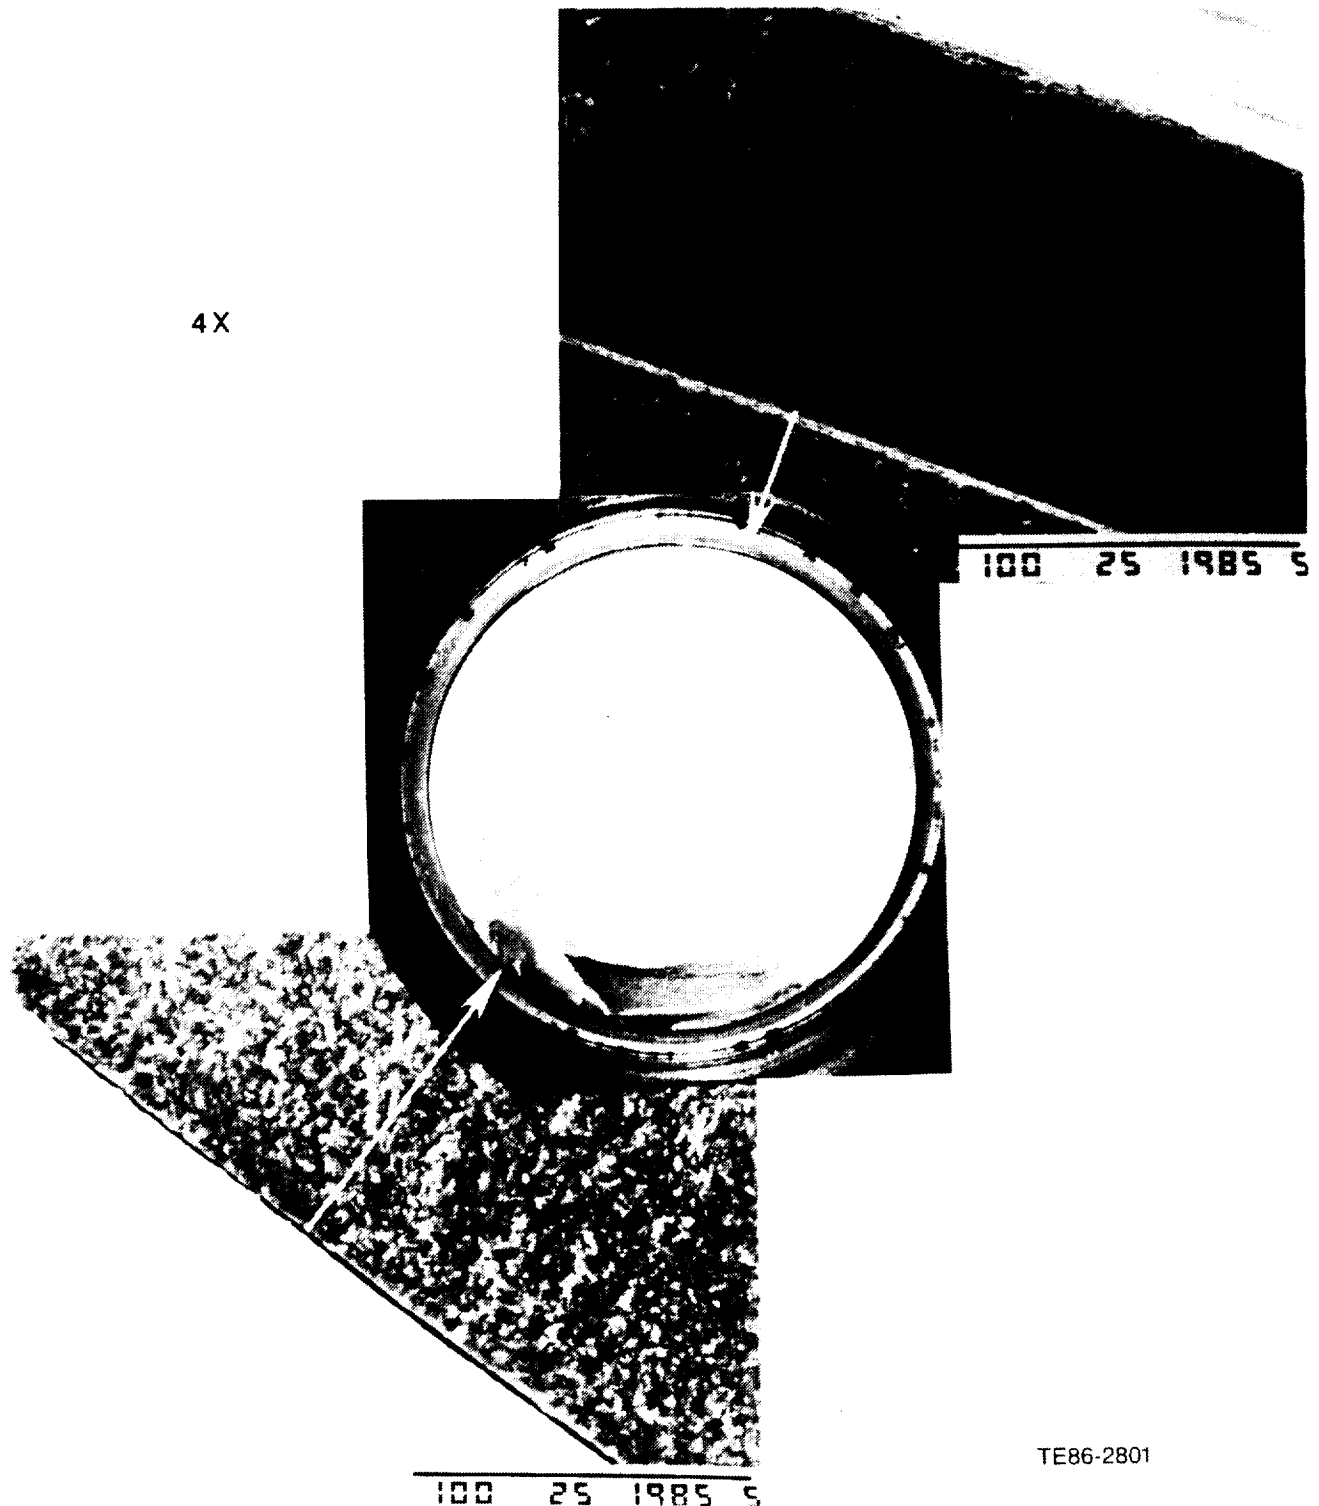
Cross section of Kyocera Si_3N_4 rotor 0004-8 showing nonuniform braze thickness. Note direct contact at fracture origin (bottom picture).
